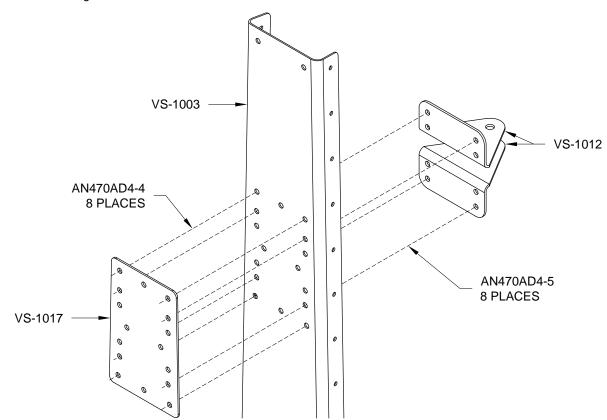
TOP RUDDER HINGE BRACKET AND HINGE DOUBLER RIVETS
